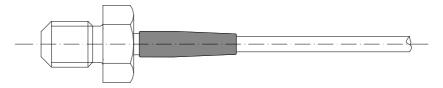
water thermoresistor -1/8" thread - Rotax engines (side view)
